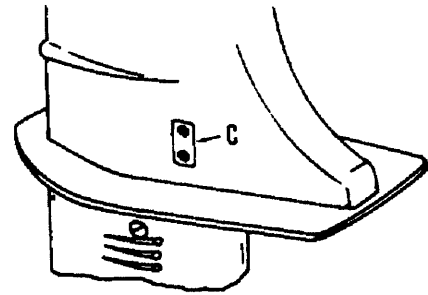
Remove inspection cover (C) for access to shift linkage screw.
